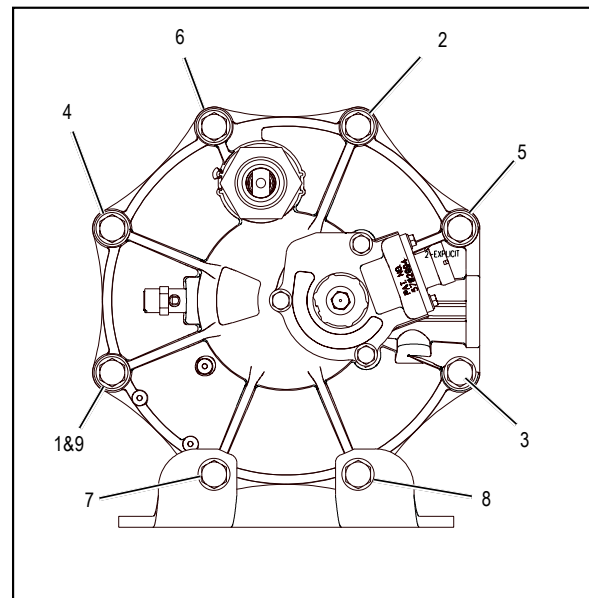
END COVER TO HOUSING TORQUE PATTERN
